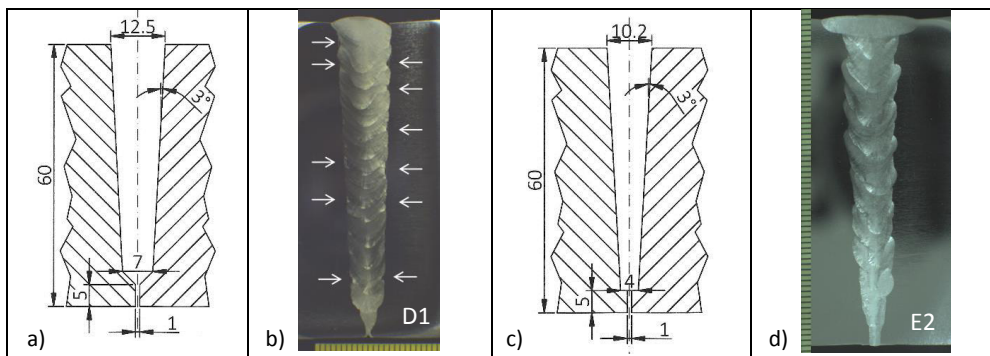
a/c) Groove geometries used in the gap filling of entire laser-arc hybrid multi-pass tests, b/d) the corresponding weld macro cross-sections of multi-pass weld D1 and E2. The white arrows are pointing the lack of fusion defects in weld D1. A total of 15 and 10 laser-arc hybrid passes were needed in D1 and E2, respectively.
